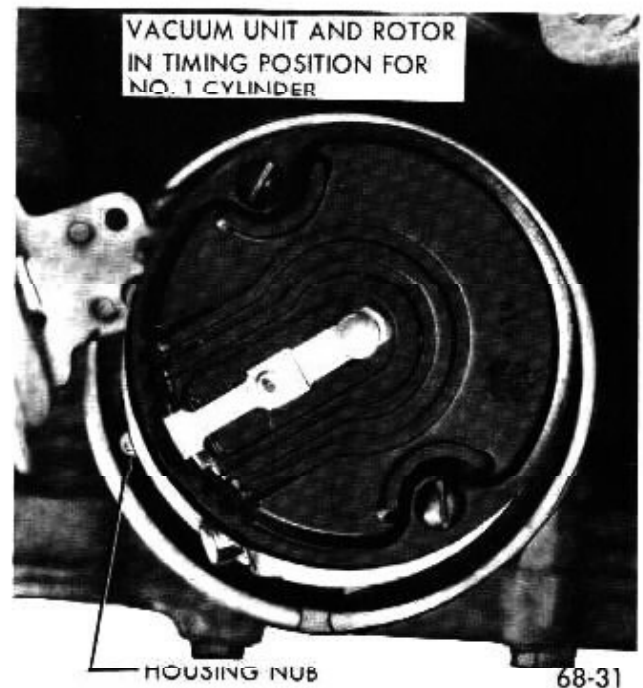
Installing Distributor in Engine - V-8 Engines
